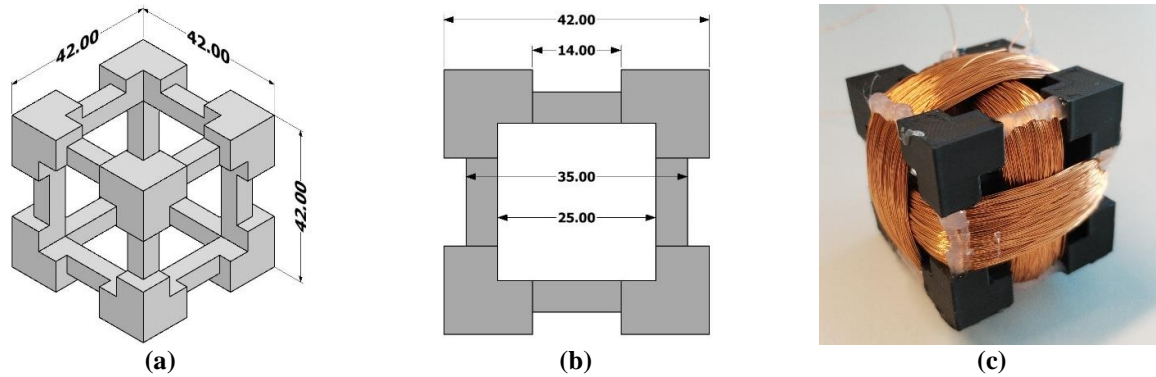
Triaxial sensor: (a) Technical drawing of the sensor body; (b) cross section of the sensor body; (c) photograph of the finished sensor.
